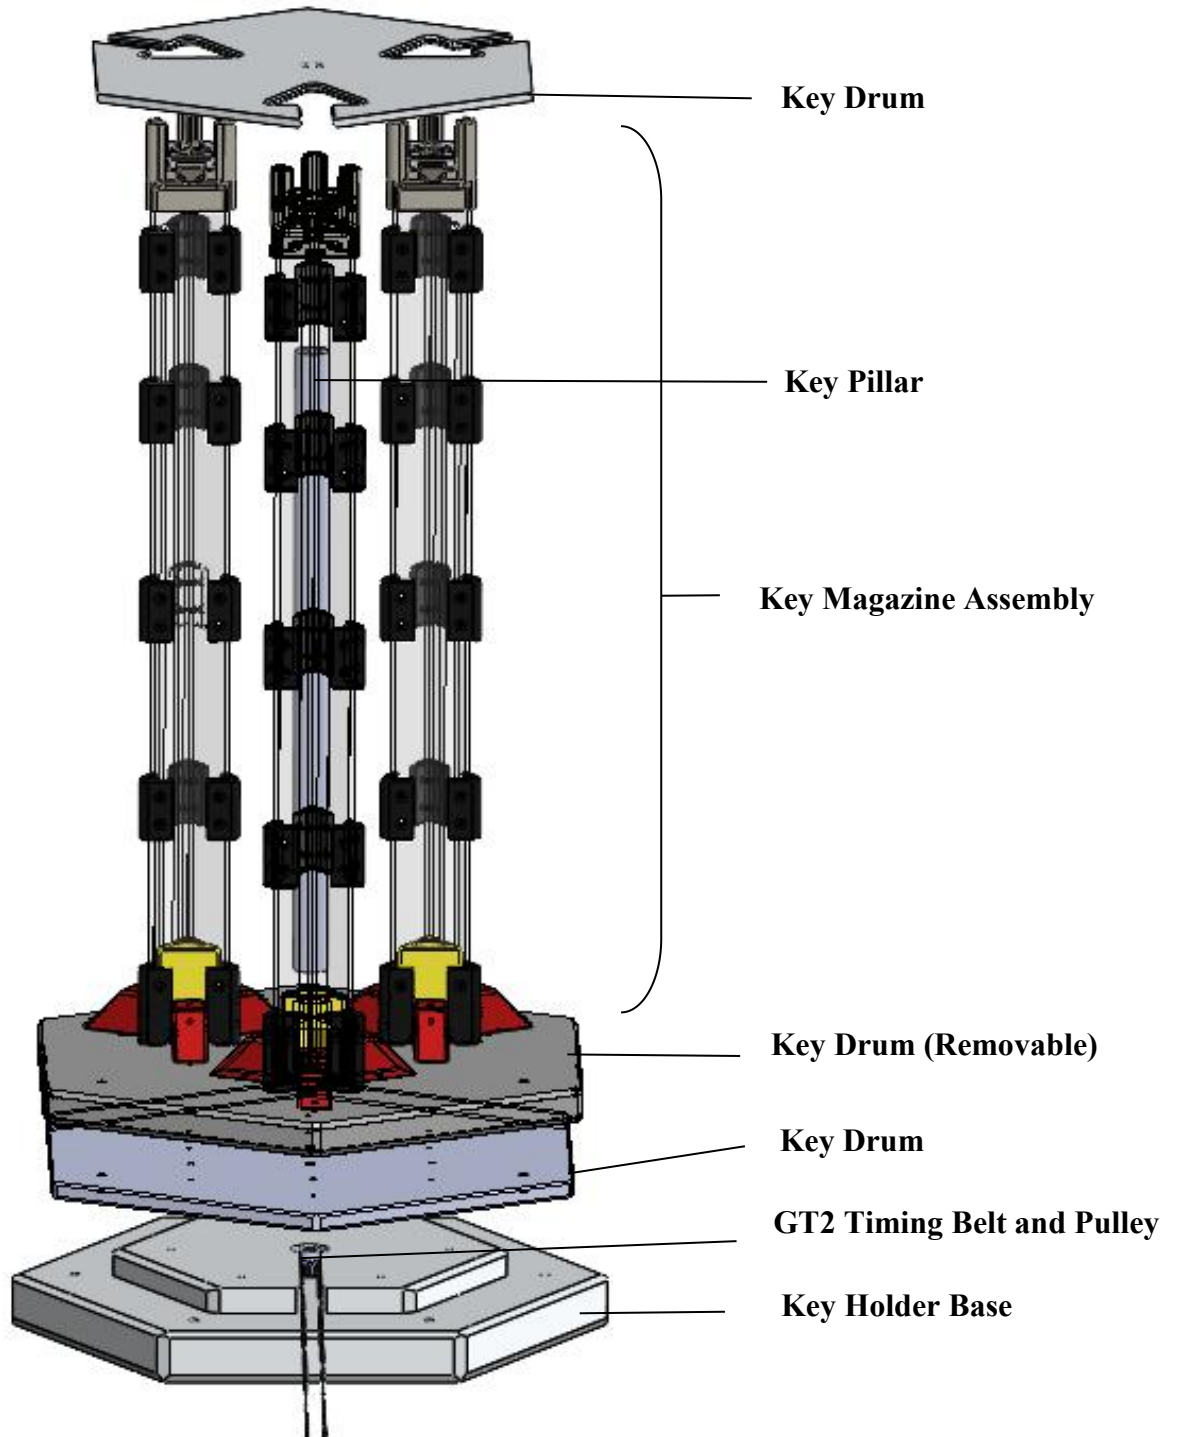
Key Magazine Main Assembly (Exploded View)
